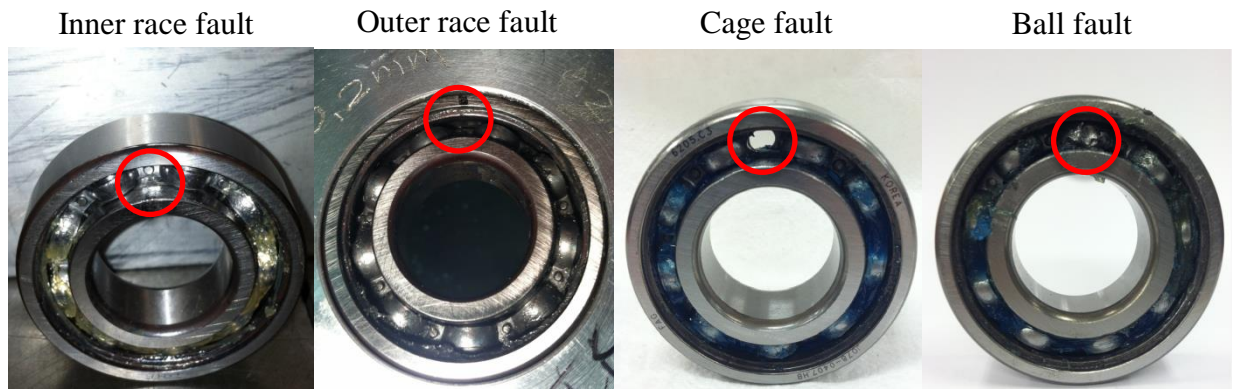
The four type 6205-2RS steel bearing seeded faults
